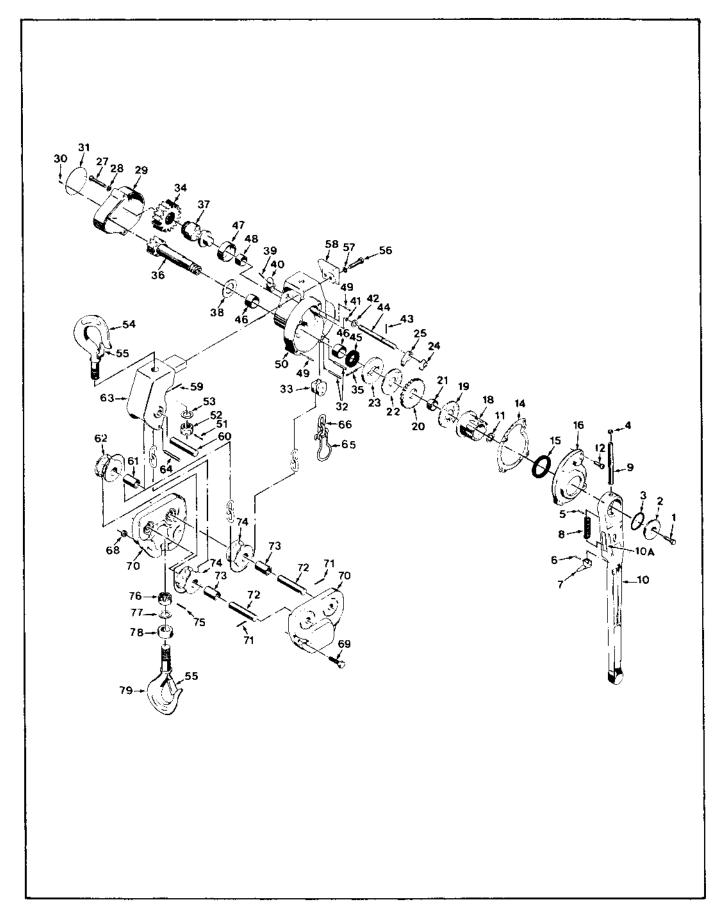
EXPLODED ILLUSTRATION OF MODEL MA-30-4 HOIST
